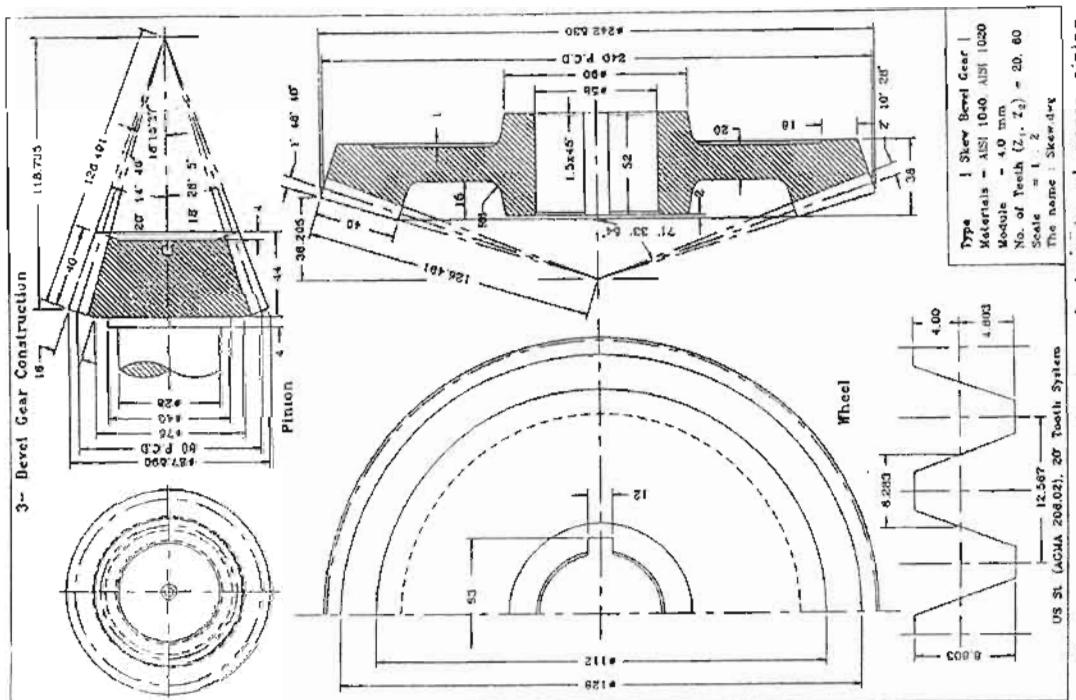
Construction drawing of skew bevel gears pinion and wheel for 30 Kw power, 800 rpm input speed, 3 gear ratio and 90° shaft angle.
